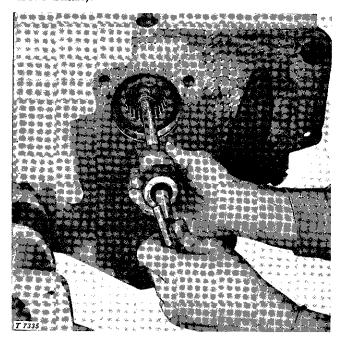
Removing Steering Clutch Drive Shaft
